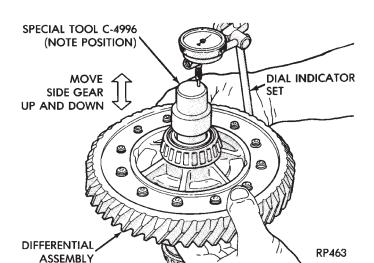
Checking Side Gear End Play (Ring Gear Side)
